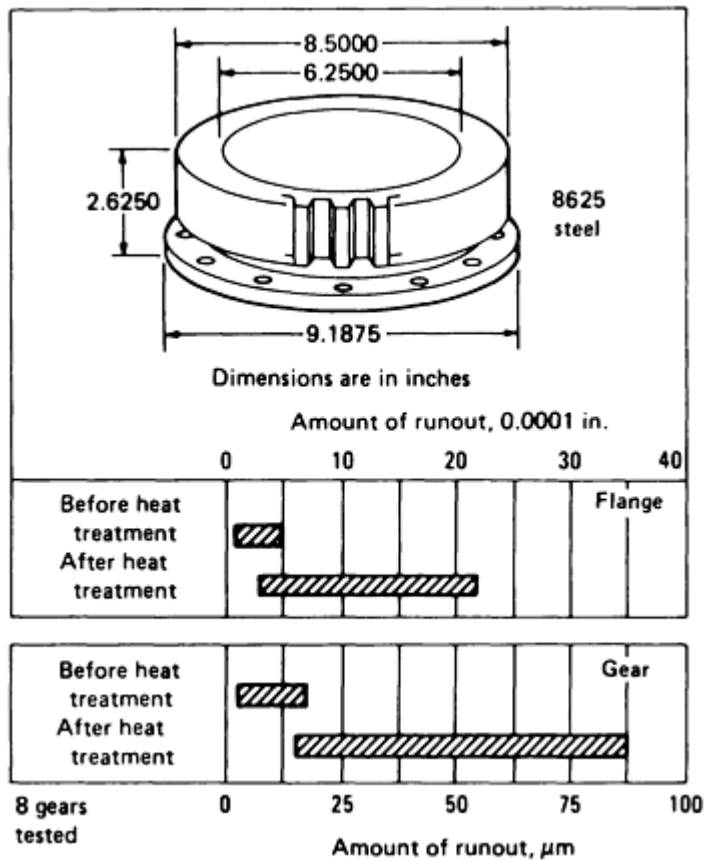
Control range for 8625 steel ring gears (Example 5). Eight ring gears made of 8625 steel were carburized to a depth of 1.3 mm (0.050 in.), martempered in oil at 190 °C (375 °F), and placed on a plug for cooling to room temperature. Measurements are total indicator readings.
